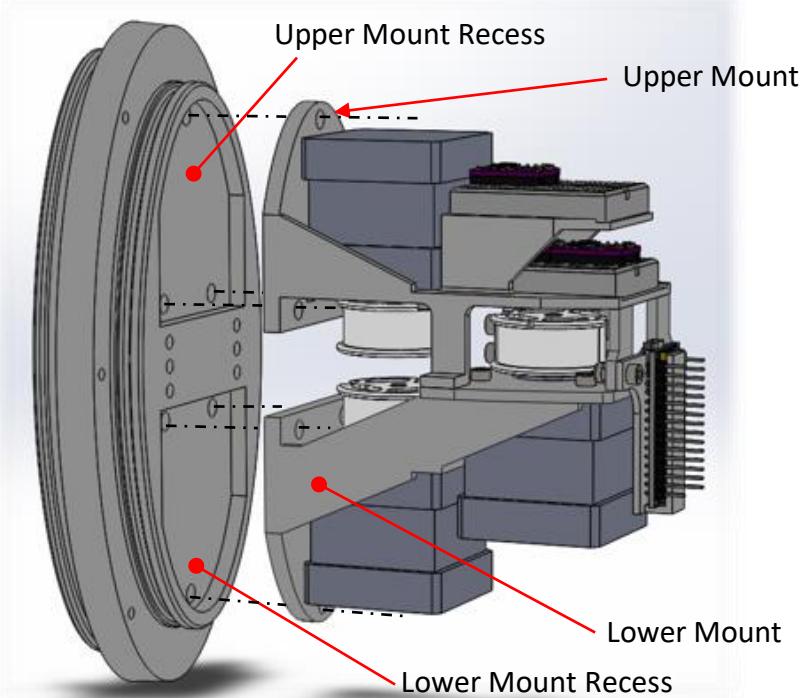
Diagram showing recesses for motor mounts and how motor mounts attach
